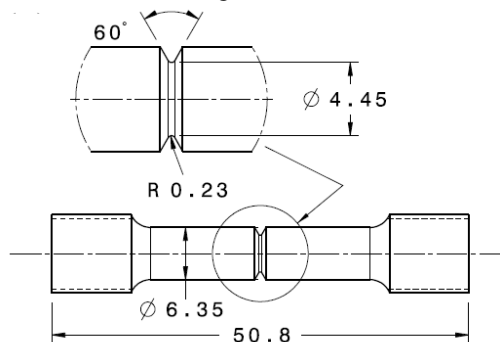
Dimensions of the type 1a.1 sample in millimeters
